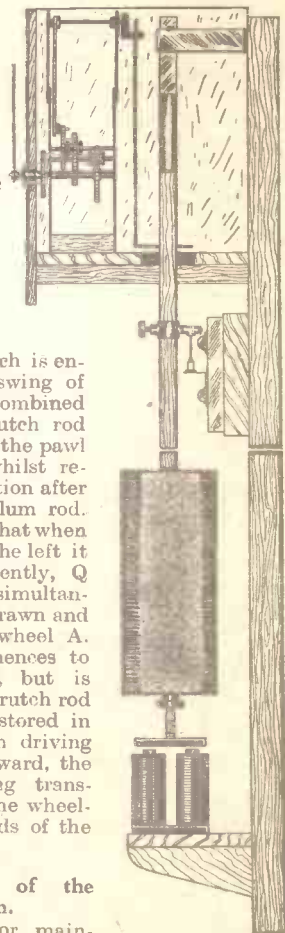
A sectional view showing how the clock should appear when assembled.
